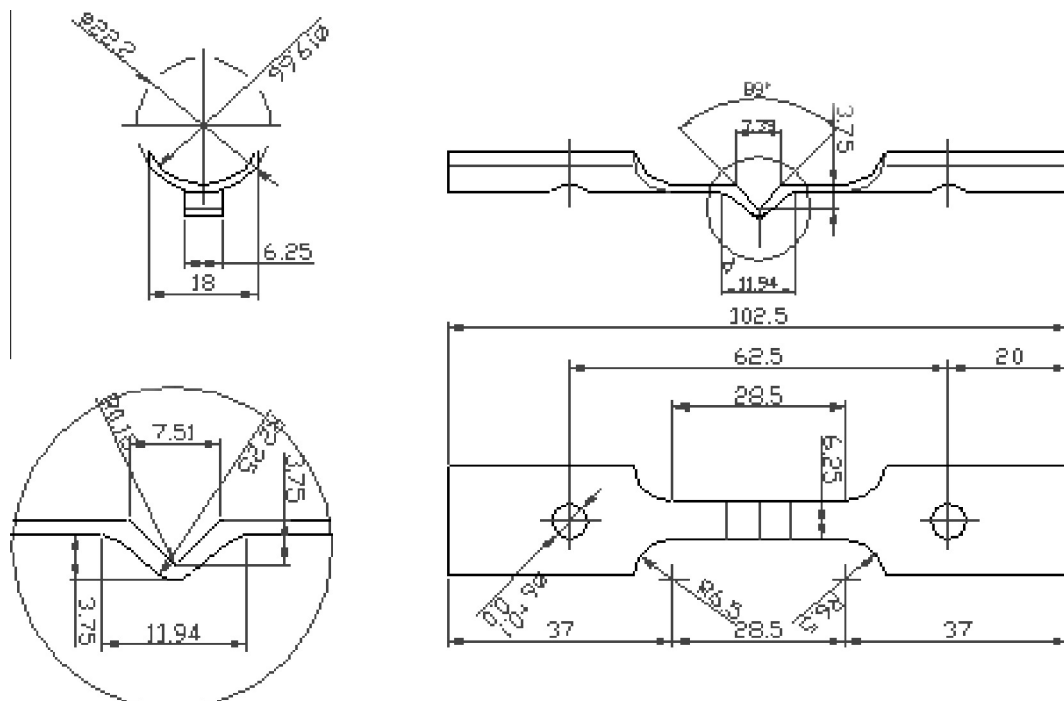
Dimension of tensile specimens with a hump used for slow strain rate tests.
